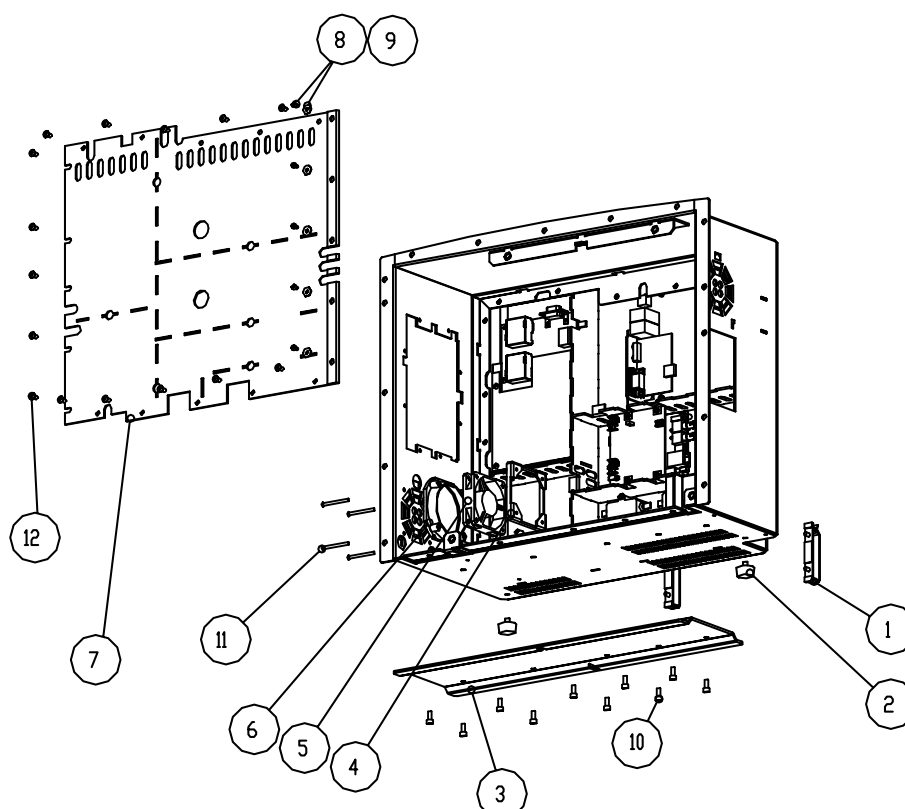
Exploded view of the MRI Shield, N-MRI2 Rev. 00, Back shell unit
